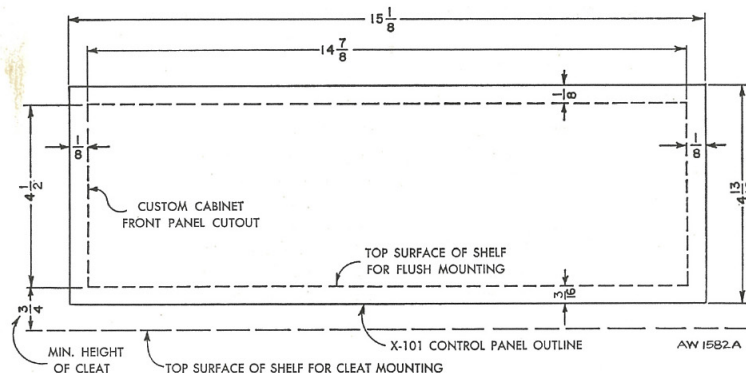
Front Panel Cutout for Mounting X-101 in Custom Cabinet
